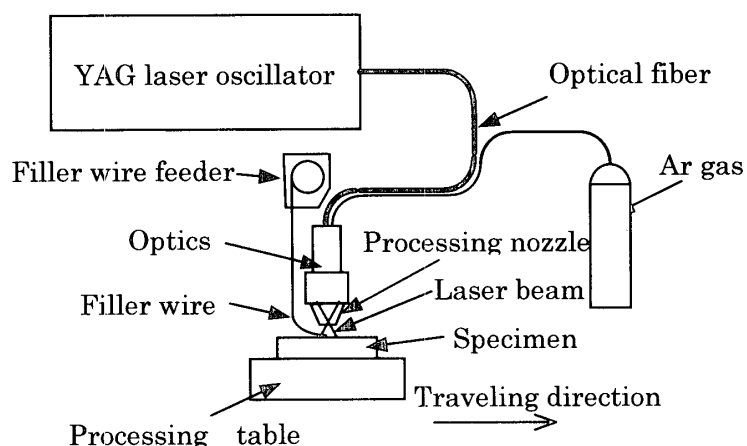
Schematic diagram of YAG laser welding with filler wire
